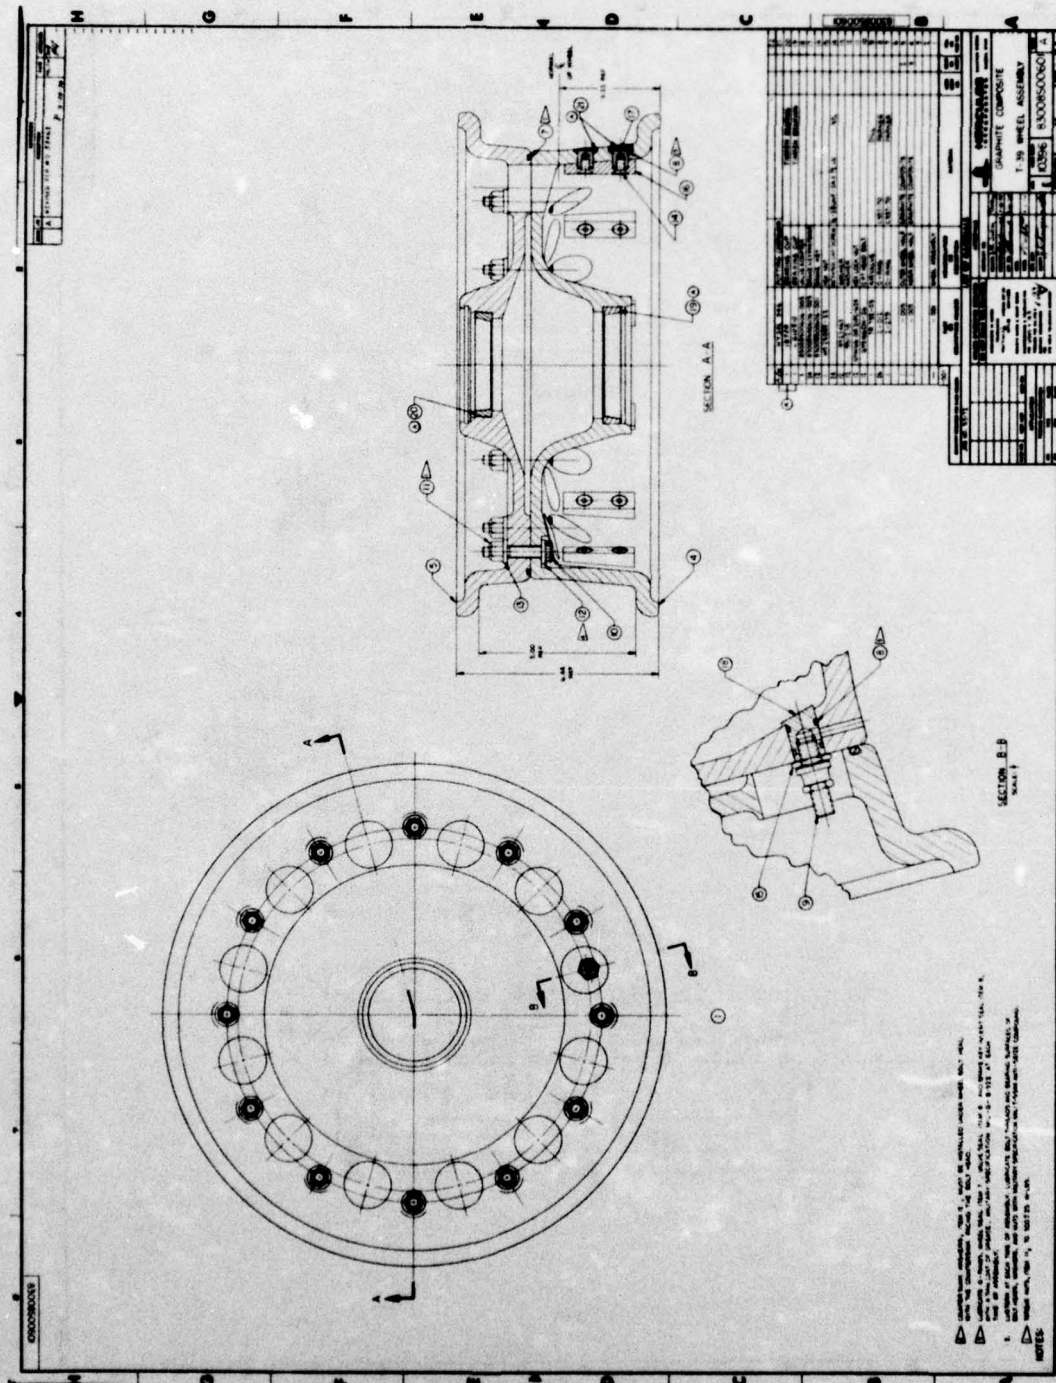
Graphite Composite T-39 Wheel Assembly (Sheet 1 of 3)
